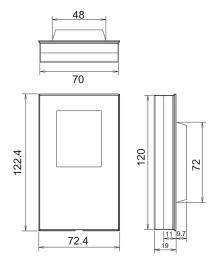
Dimensions (unit: mm) of this product and optional thermoplate
